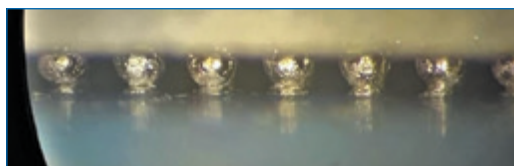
Side D solder balls before rework is done by vapor phase soldering
